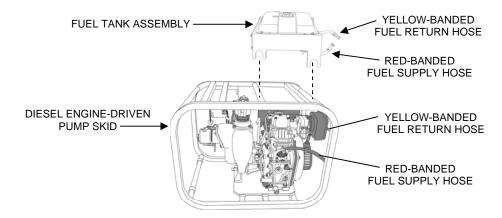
Diesel-Driven Pump Fuel Tank Installation.
